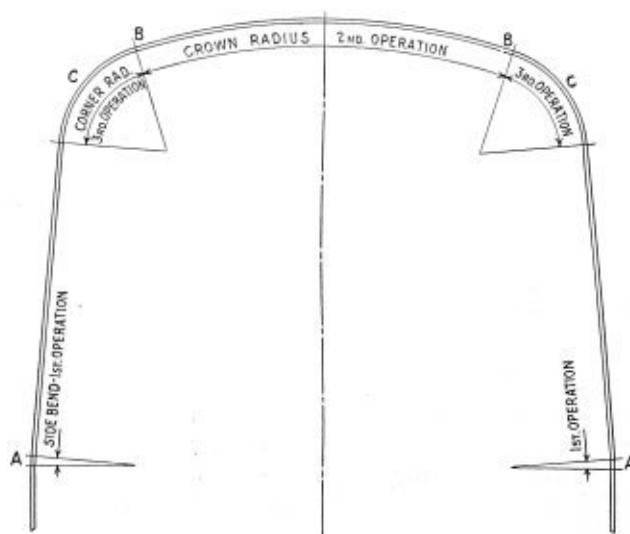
Cross section of a one-piece crown and sides sheet rolled into shape, showing locations of the rolling operations
